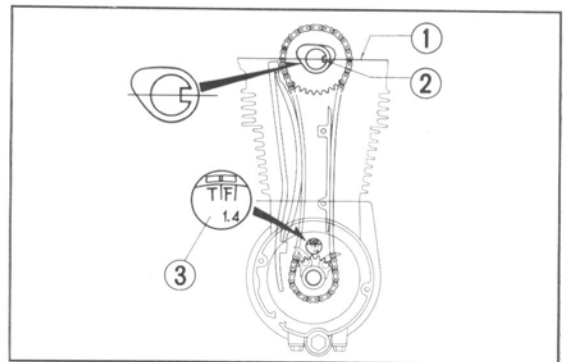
① Cylinder head flange surface ② Cutout notch ③ Spark advancer
